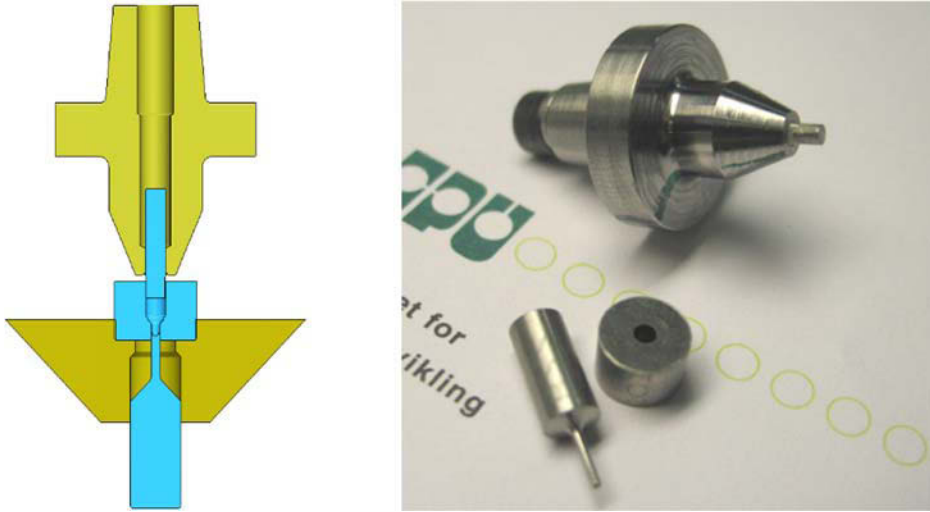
Direct Die Manufacturing by Micro-EDM Milling.
